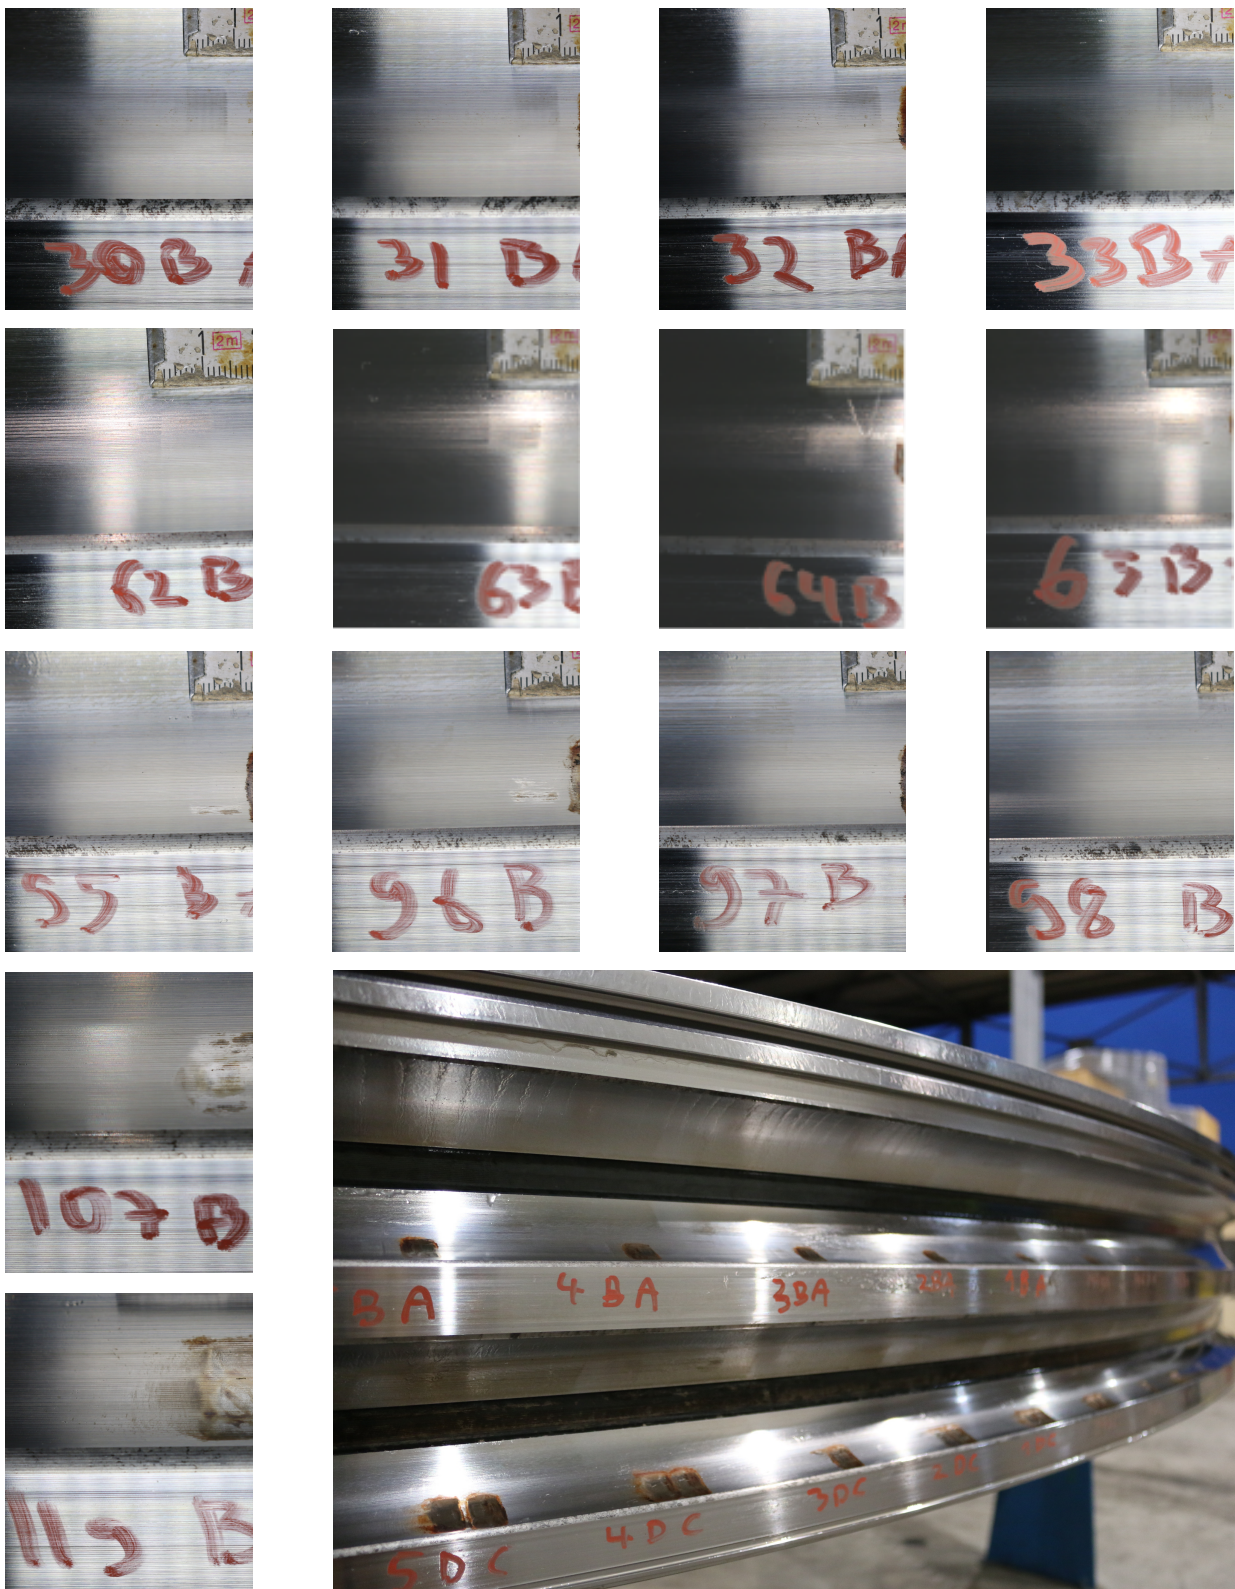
Raceway condition inner ring, Test ID 11, Bearing ID 0002
